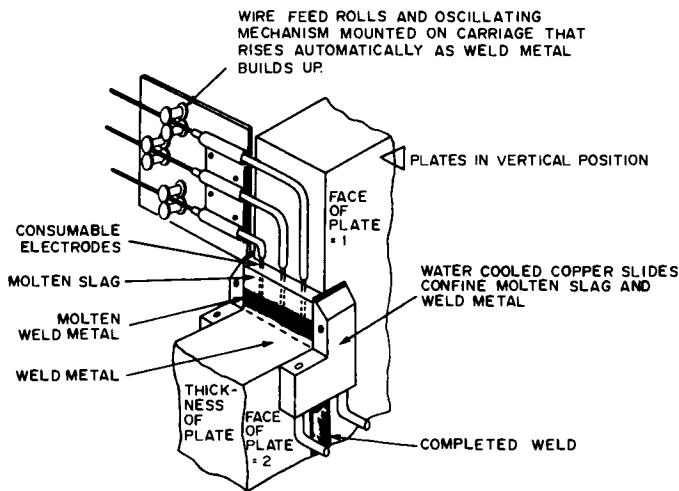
The process of electroslag welding.⁽¹²⁵⁾
